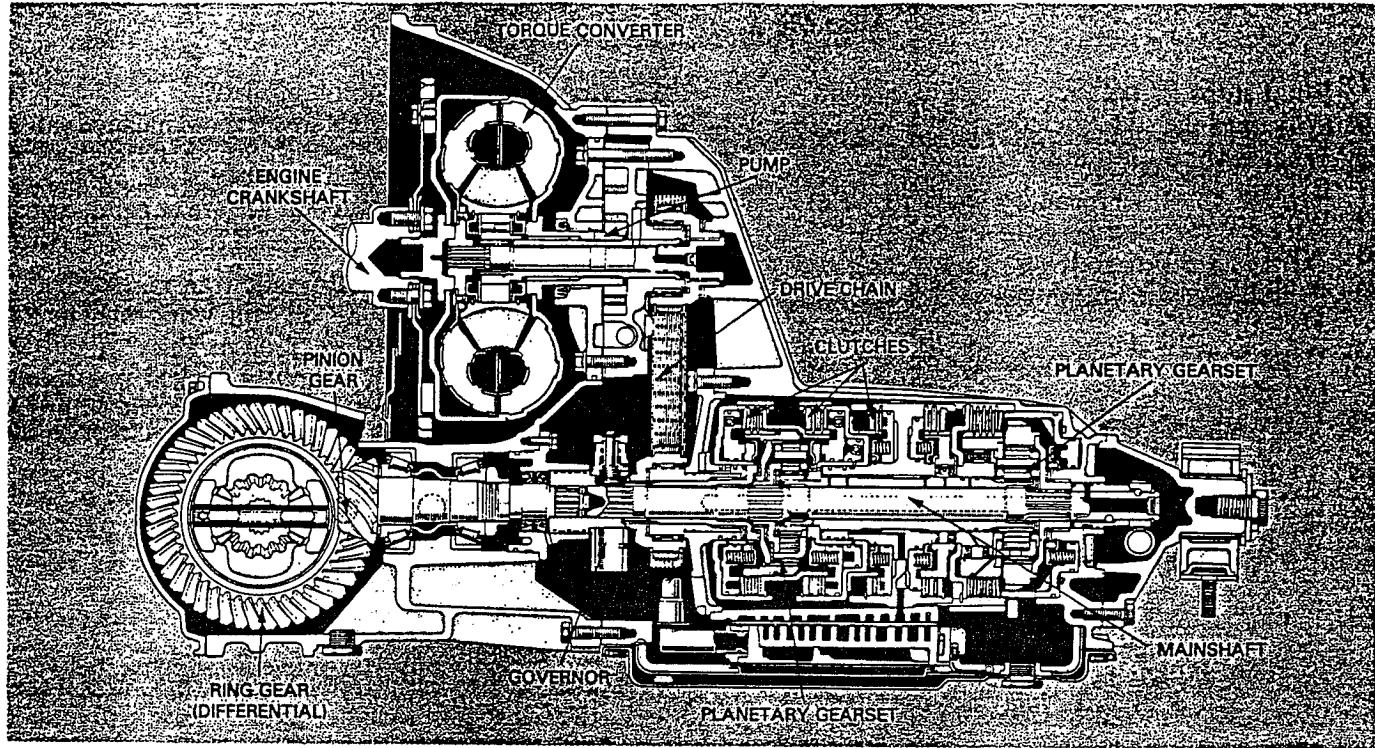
Three-speed automatic transaxle (transmission and drive axle make up an integrated assembly). (Toyota)
